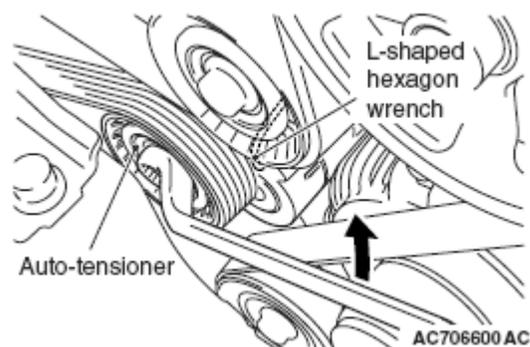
Applying Tension To Drive Belt With Auto-Tensioner Clockwise
